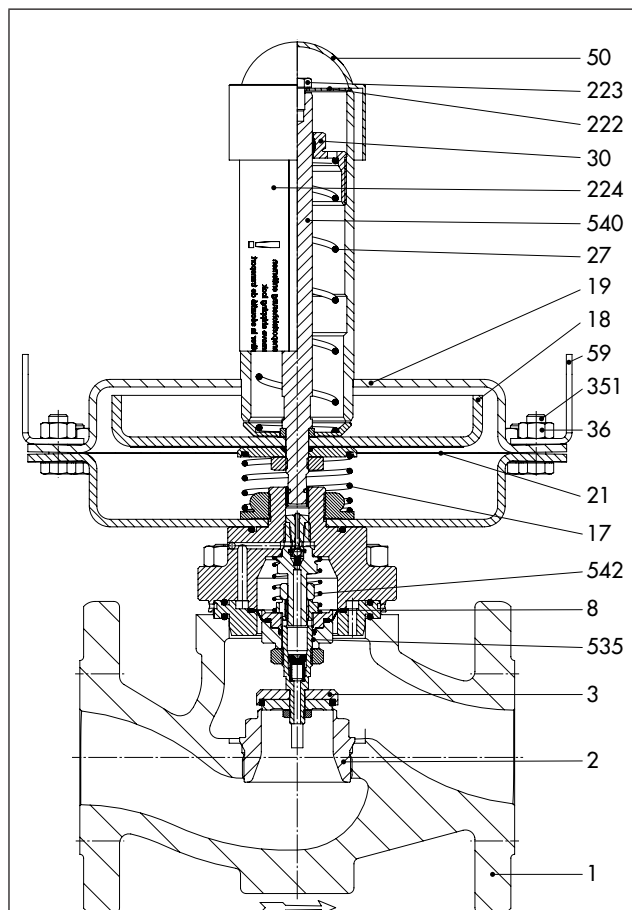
Type 2405 Pressure Reducing Valve with pressure balancing · Nominal size DN 32 to 50 · Set points 0.005 to 0.060 bar · Flow-to-open (two-step control mode)
